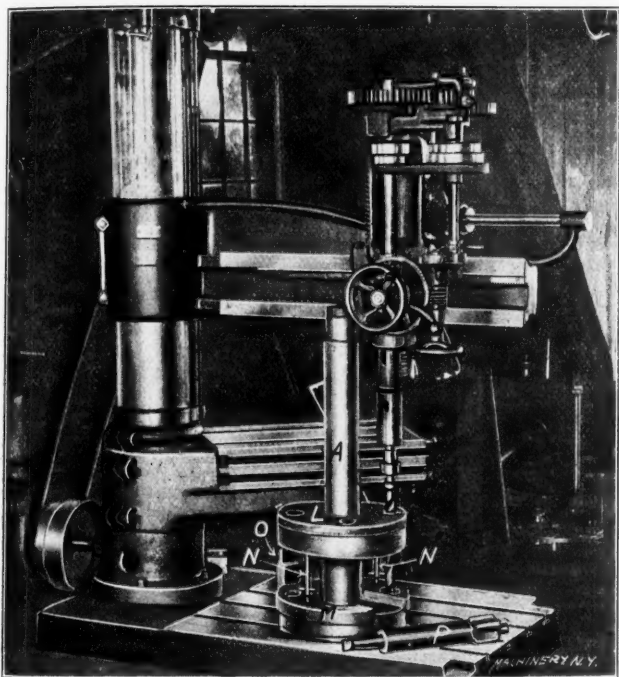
Roughing Out the Spindle Holes in the Radial Drill by Drilling and Counterboring.
